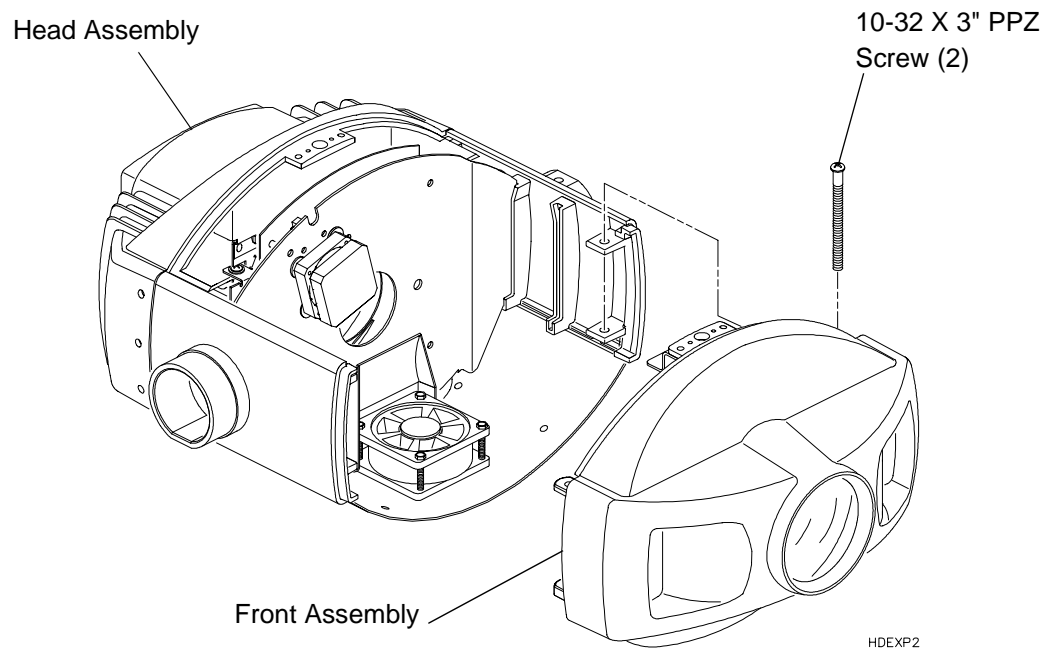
VL6 Luminaire Front Assembly Replacement
